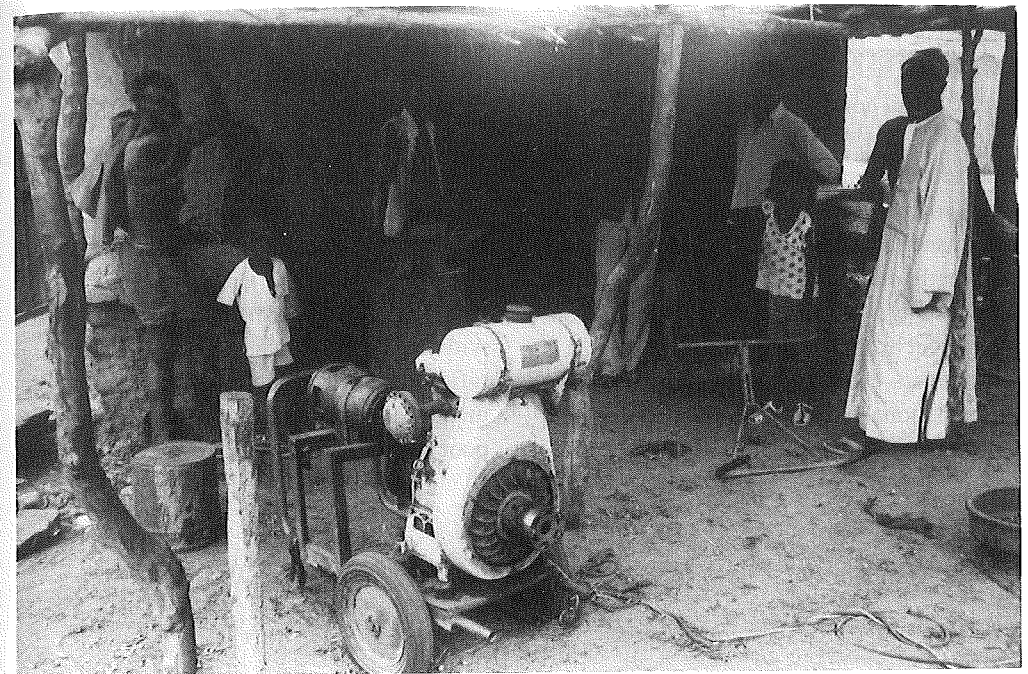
Blacksmith with welder in Karang (Photo: Schmitz)
